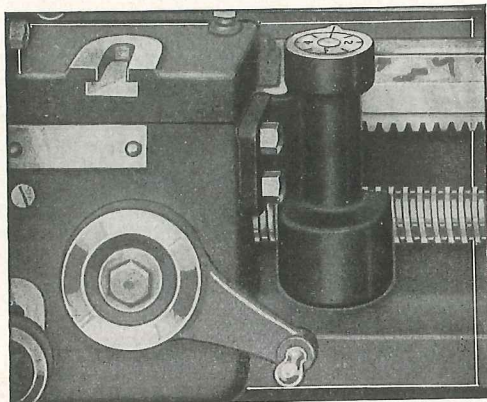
Thread Indicator Fitted to the Carriage of the New Model South Bend Lathe
